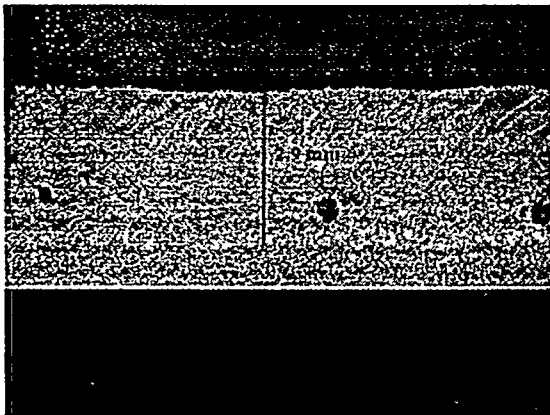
Closeup of longitudinal section view of weld No. 3 in Table 5.
